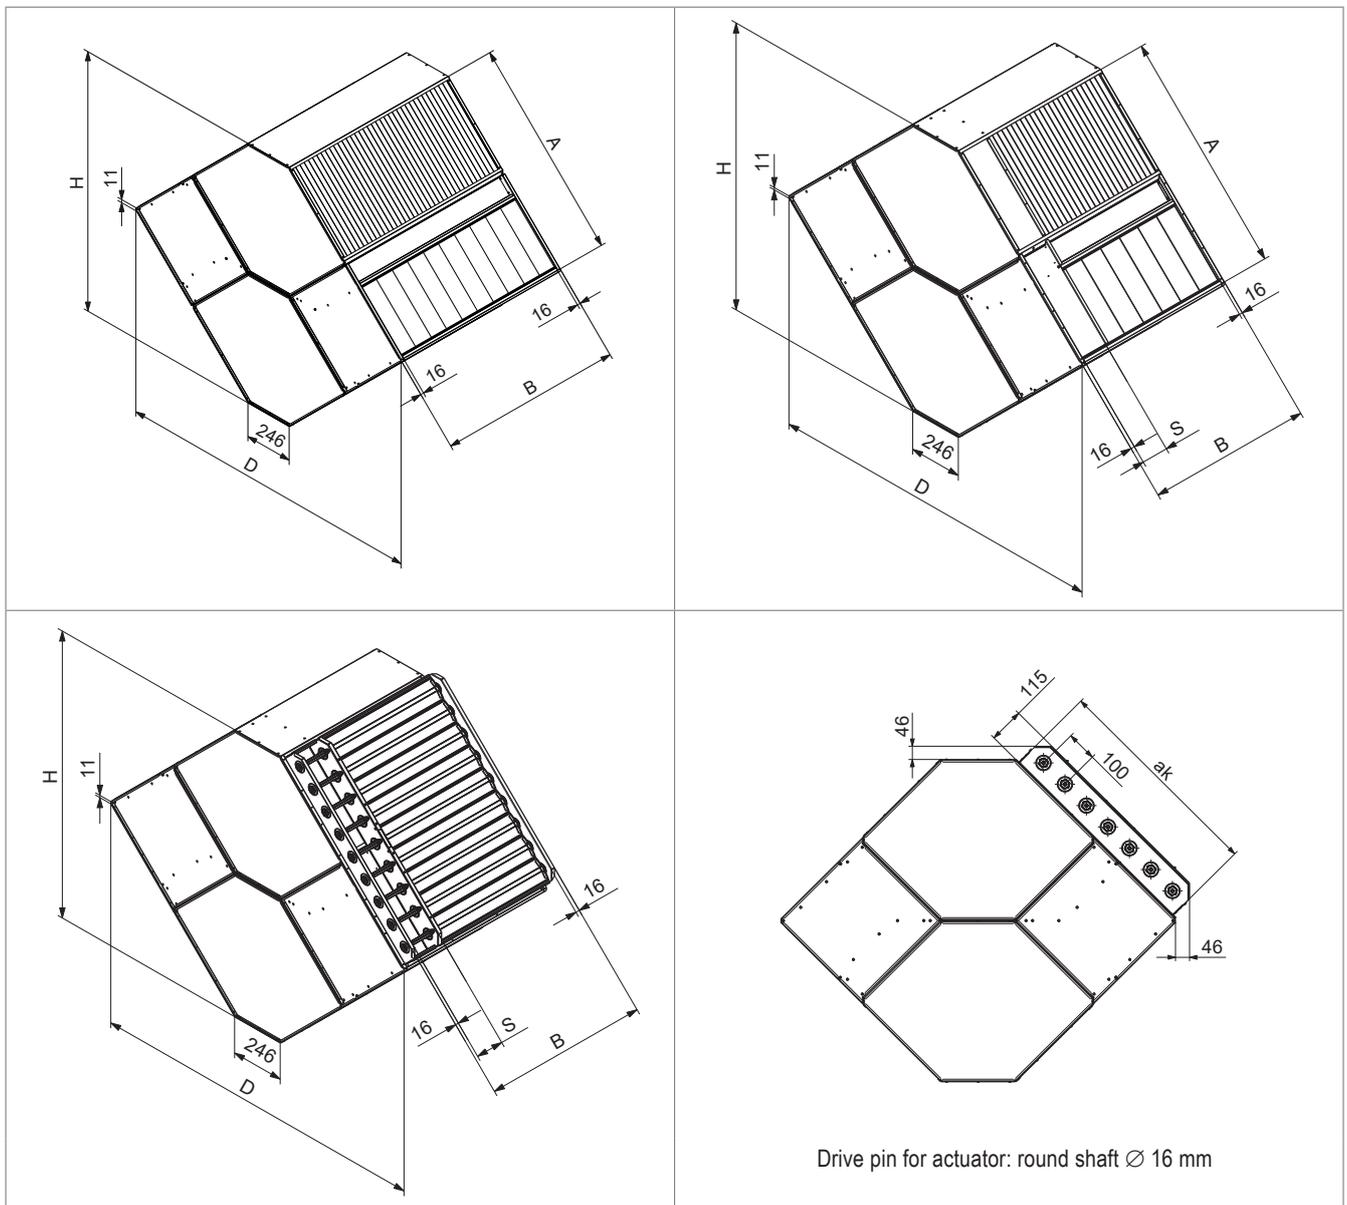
Dimension sheet for Gotthard plate heat exchanger of the construction type C (dimensions in mm)
